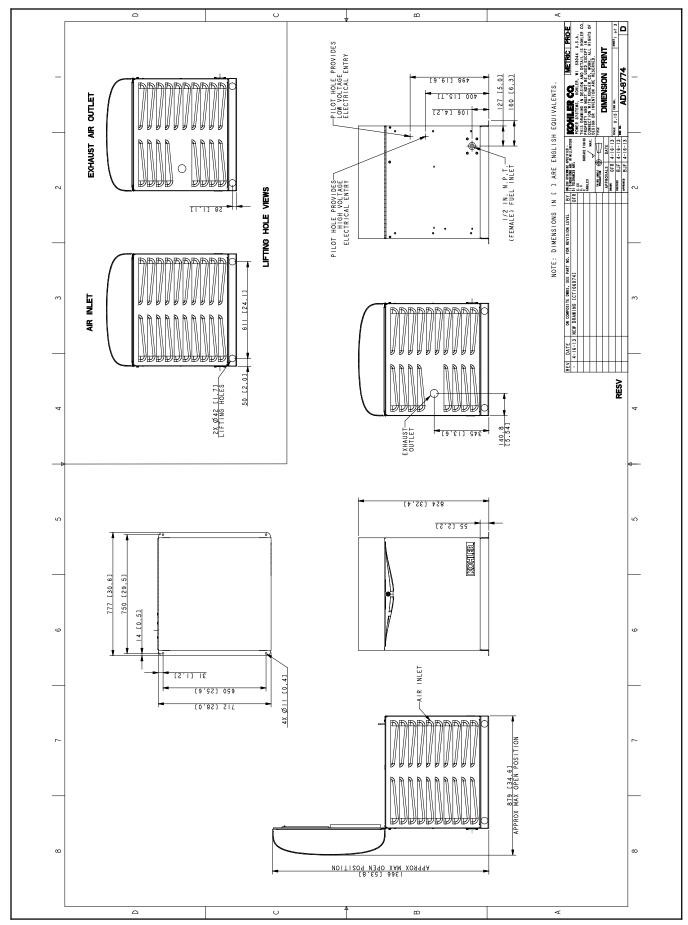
Dimension Drawing ADV-8774, Sheet 1 (for specification numbers GM88347-GA7 or higher)
